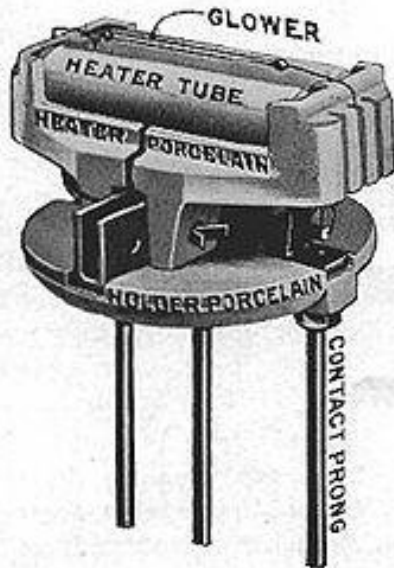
NAMES OF PARTS OF THE NERNST LAMP HOLDER
